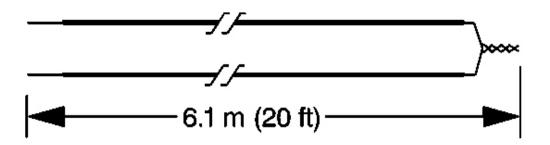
Fabricating 20 Ft. Deployment Harness Courtesy of GENERAL MOTORS CORP.
